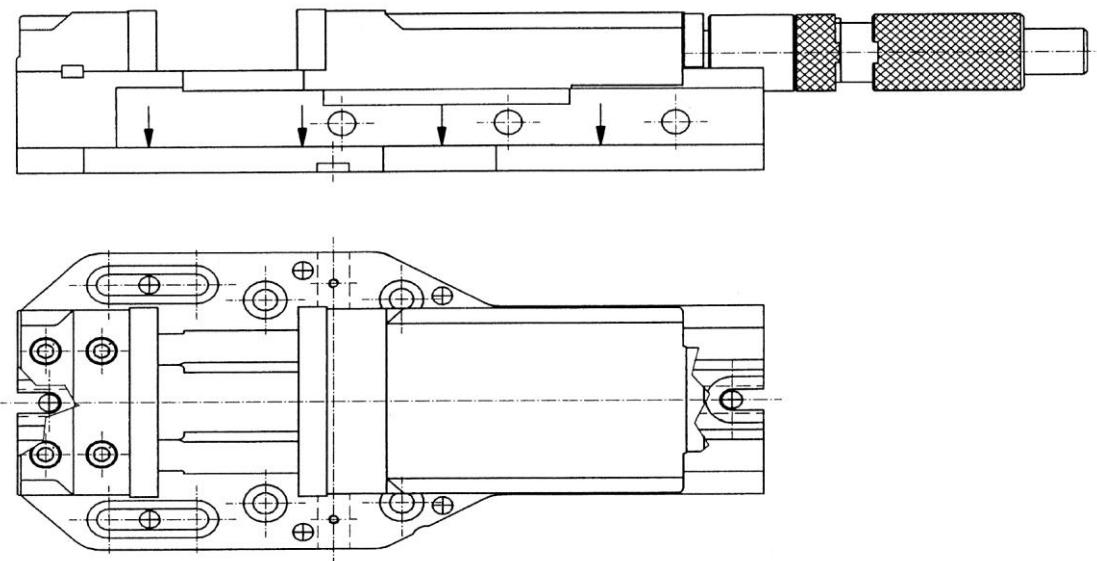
Recommended vice fastening points on the lathe table with fastening screws and pressure lugs.
